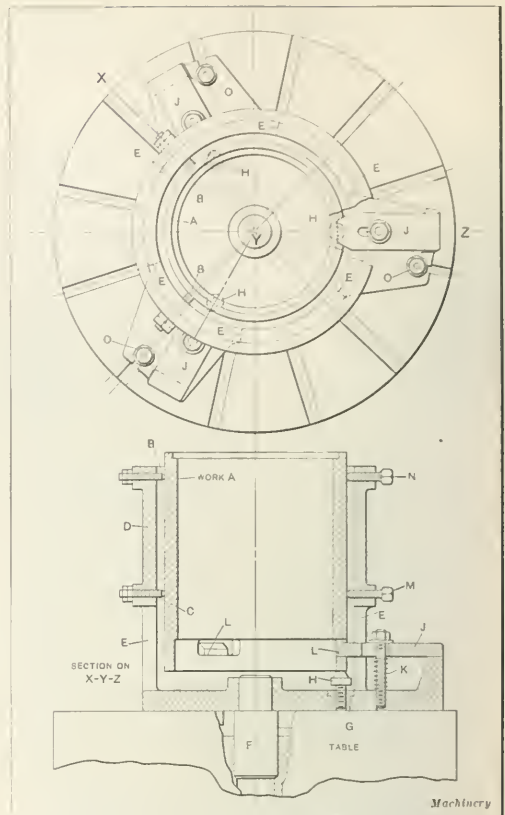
Fixture for holding Casting A which is to be finished by a Single Operation
